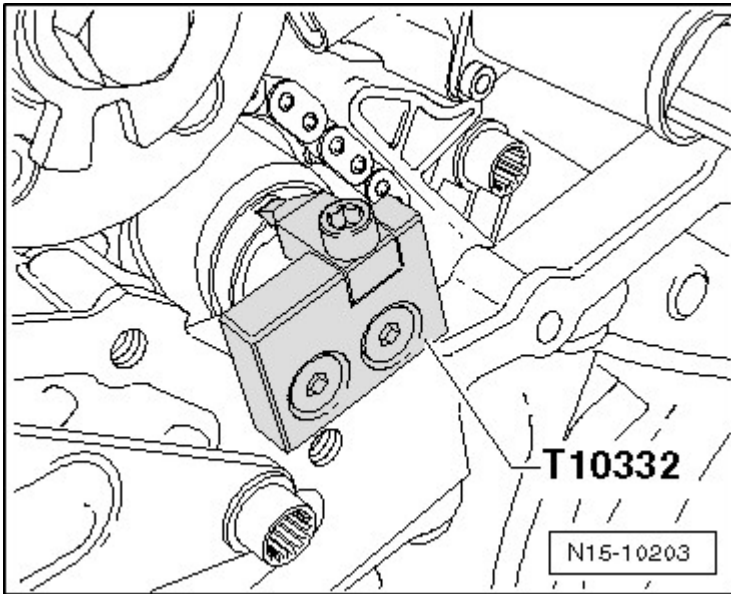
Securing Position Of Drive Pinion For High Pressure Pump Using Adjustment Tool T10332
